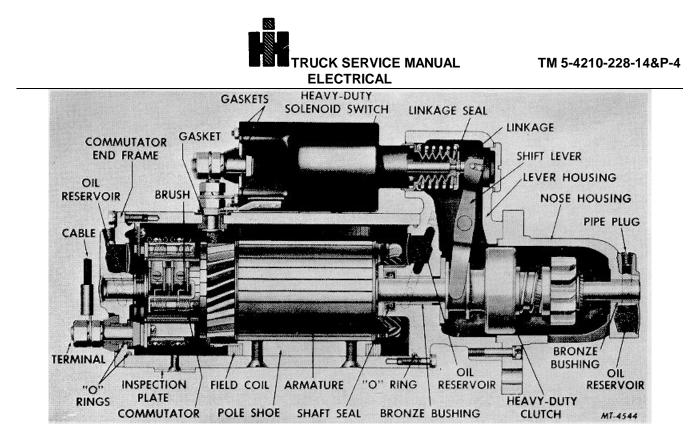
Sectional View of Starting Motor with Heavy Duty Sprag Clutch
